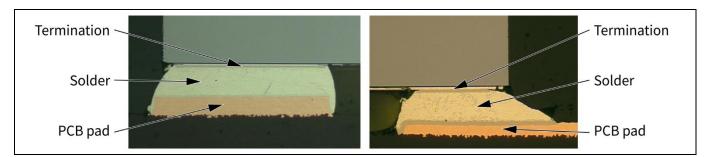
Cross-sections through SG-WLL solder joints of 0201 (left) and 01005 body size (right).
